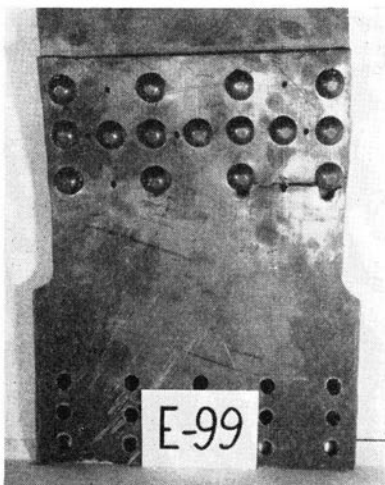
FAILURE BY SHEET TENSION; LAP JOINT WITH TRIPLE ROW OF RIVETS, SPECIMEN E-99
